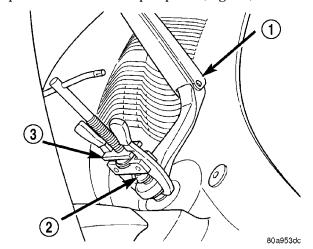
WIPER ARM PULLER (SHOWN ON FRONT WIPER ARM)
